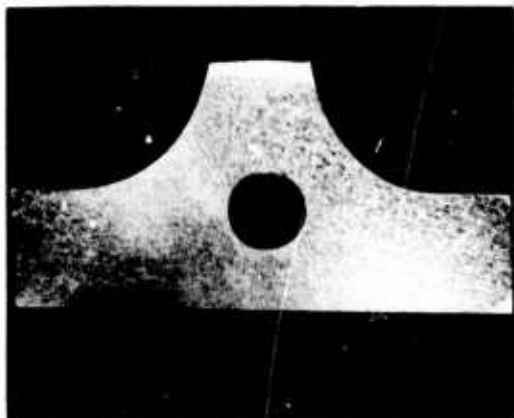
Forging Grain Transition - Mounting Pad, Outboard
